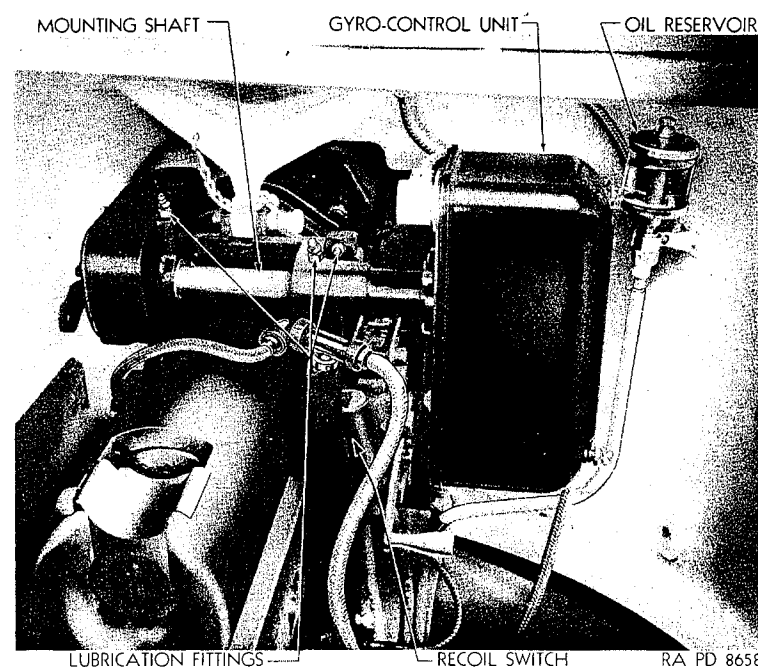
Mounting Shaft and Bracket, Gyro-Stabilizer
